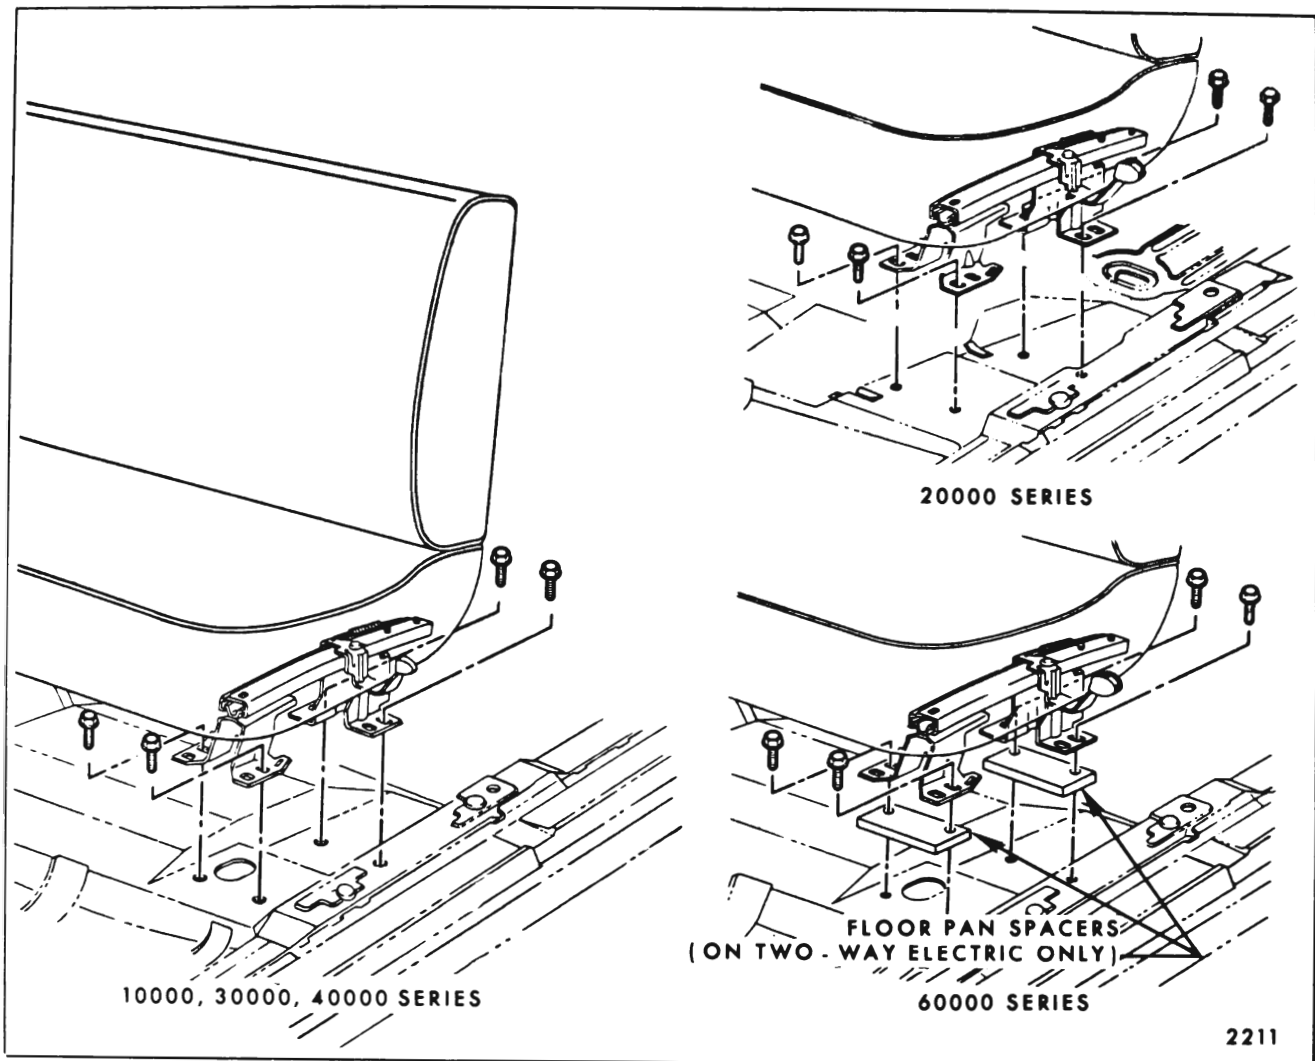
Seat Adjuster Floor Pan Attachment - "B & C" Full Width Seat
